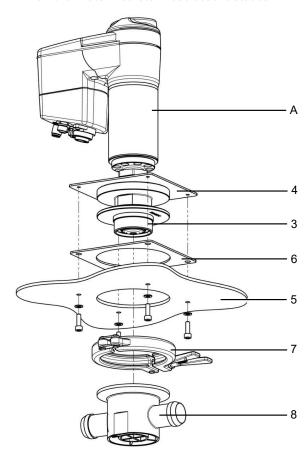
Disassembling the pneumatic stainless steel actuator – housing
